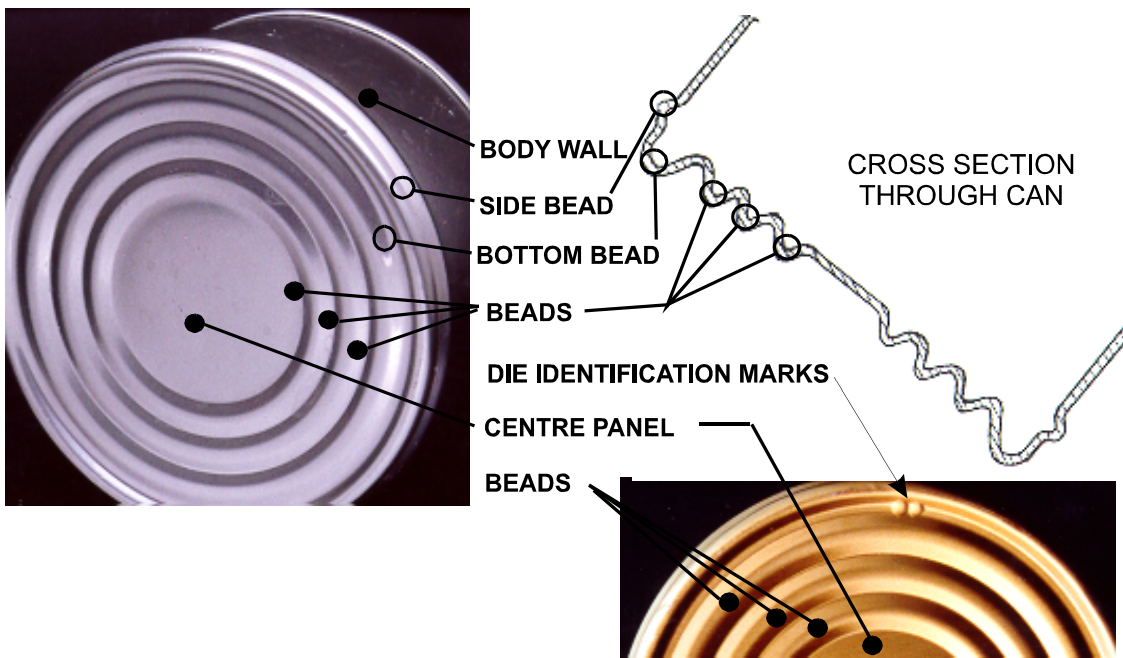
b - Two Piece Can - Integral End with Flex Bottom
